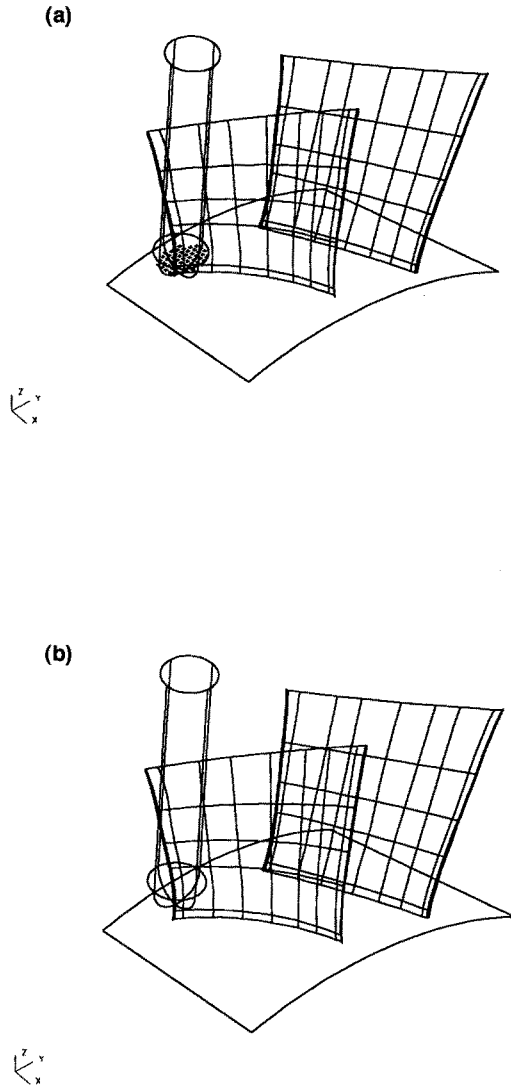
(a) The occurrence of tool undercut between a ball-end cutter and the bottom surface of the test example. (b) The ball-end cutter in the new cutter location causes no undercut with the test example.
